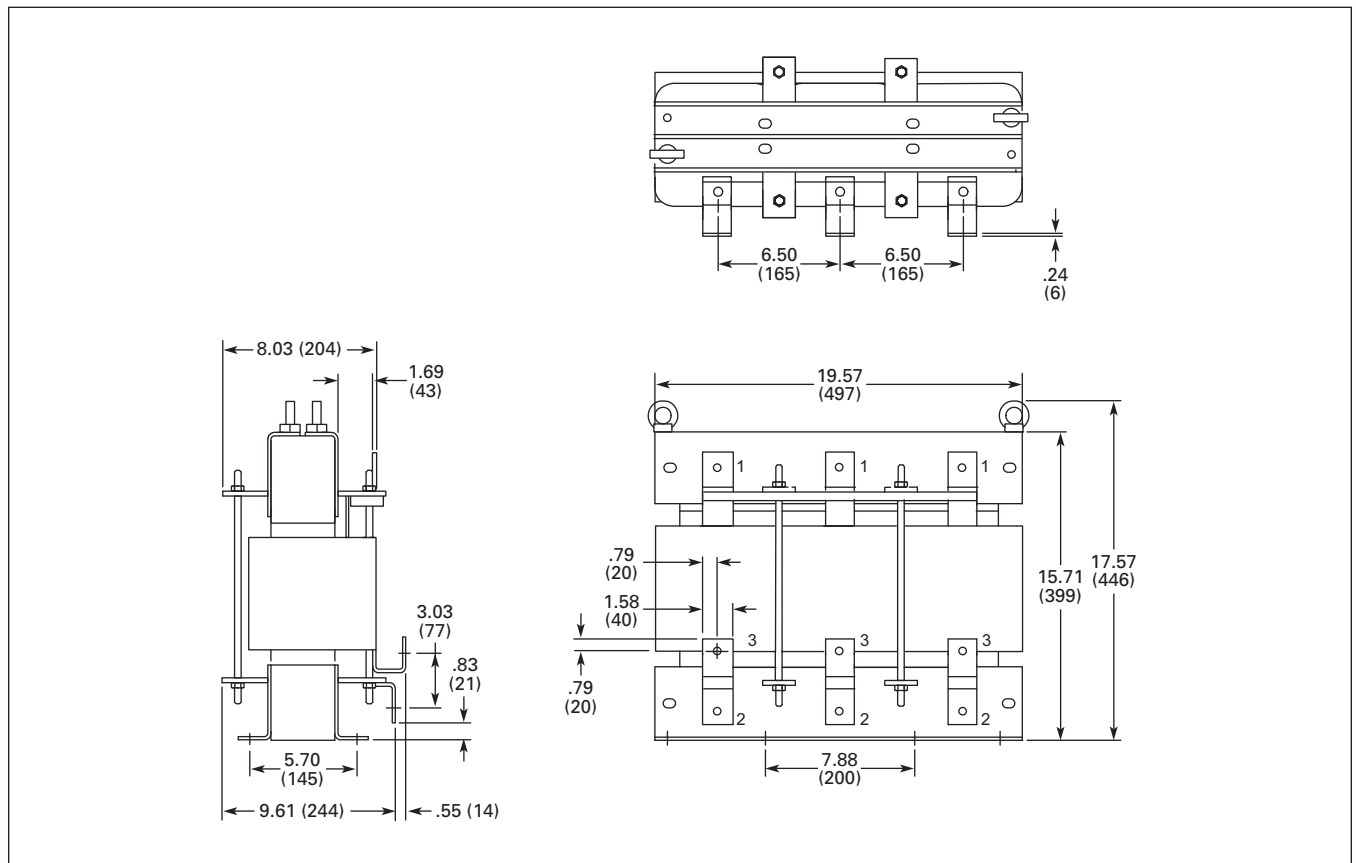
Dimensions of AC Choke CHK0520 in Inches (mm)
